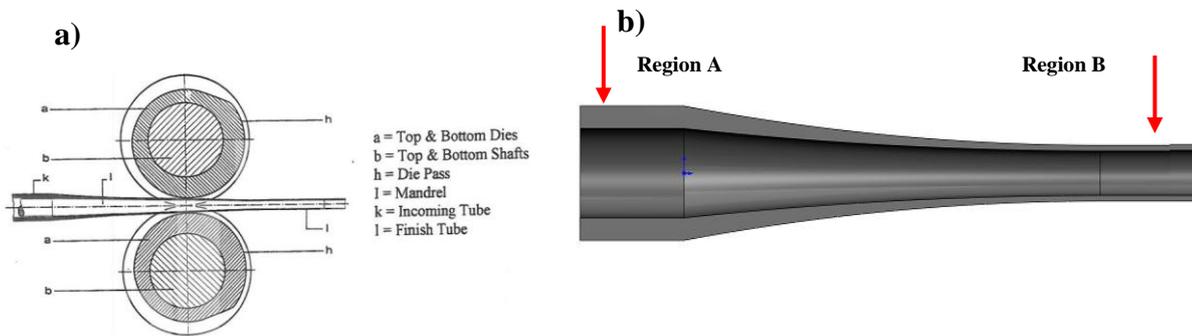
a) Side view of the Pilger principle [4] b) Enlarged conical shape of cone
